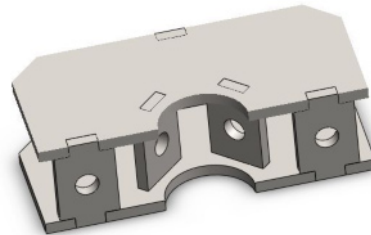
Slot and tab method to reduce welding work and simplify assembly. In practise the desing can also resist the distortions and strengthen the structure by proper dimensions and shapes agains the load in use.
